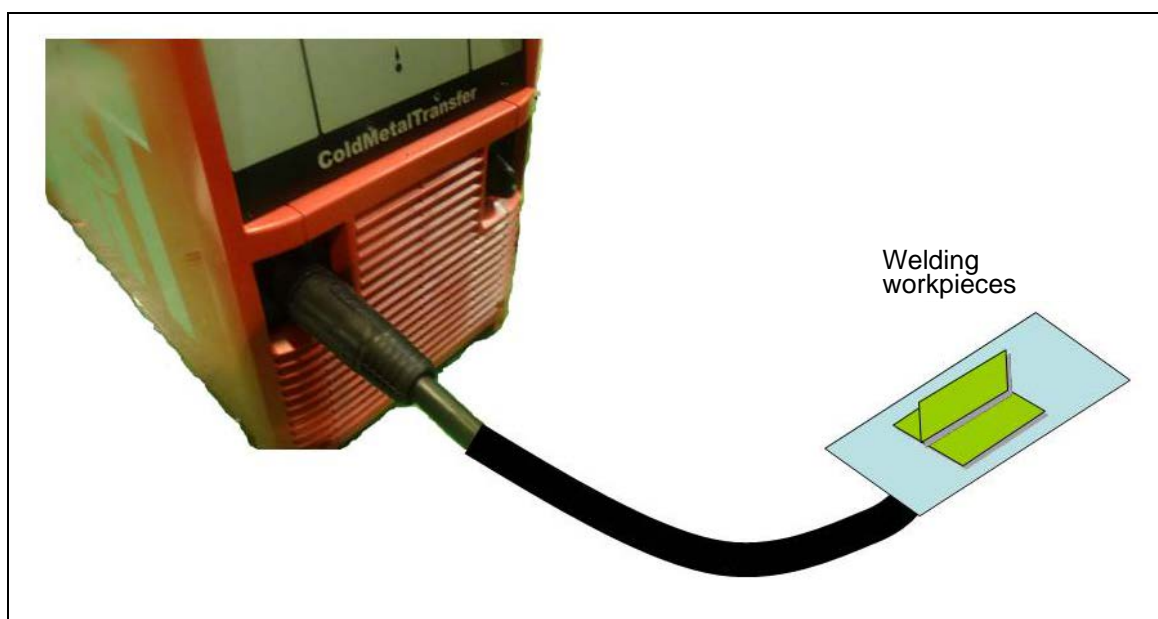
(b) Connection of welding power supply
